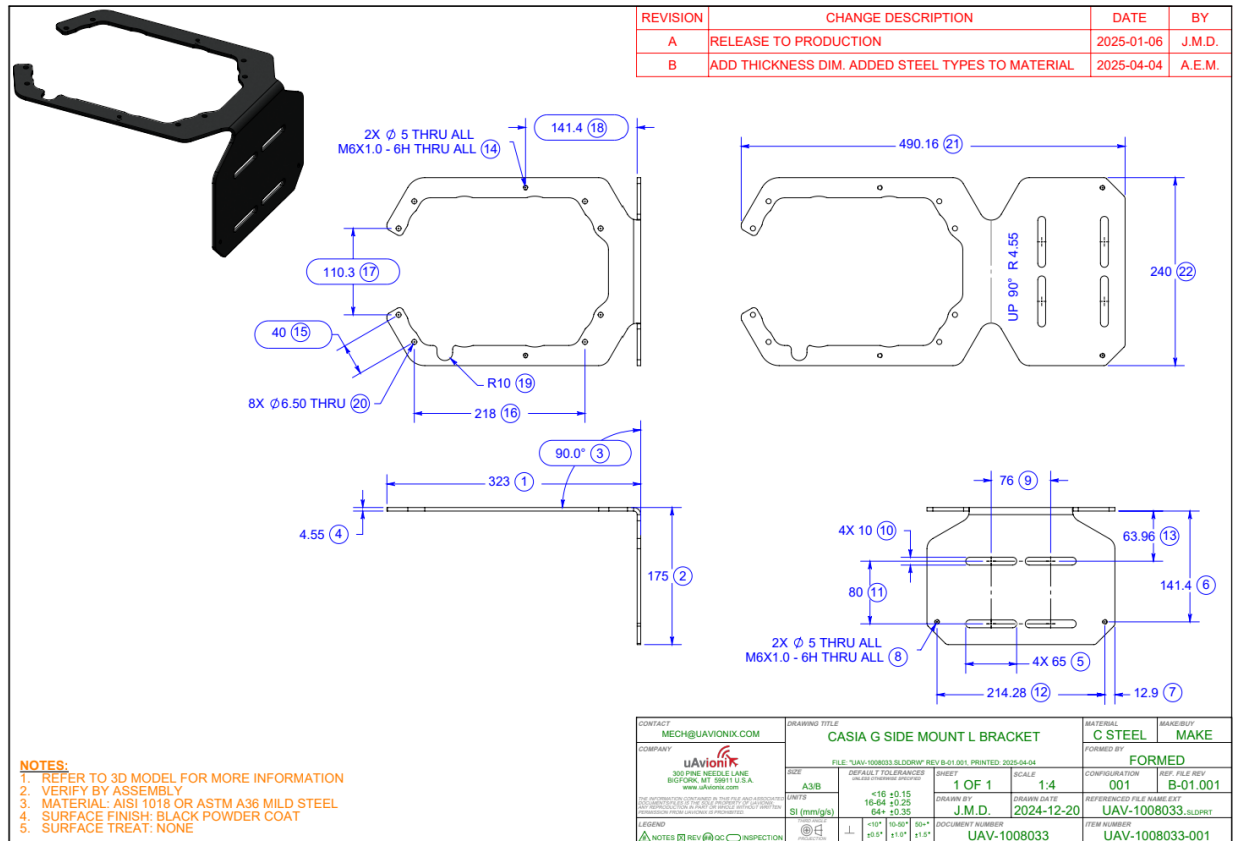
Casia G Side Mount Assembly Dimensions and Layout
